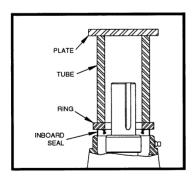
Placement of Tooling for Installation of Inboard Seal
